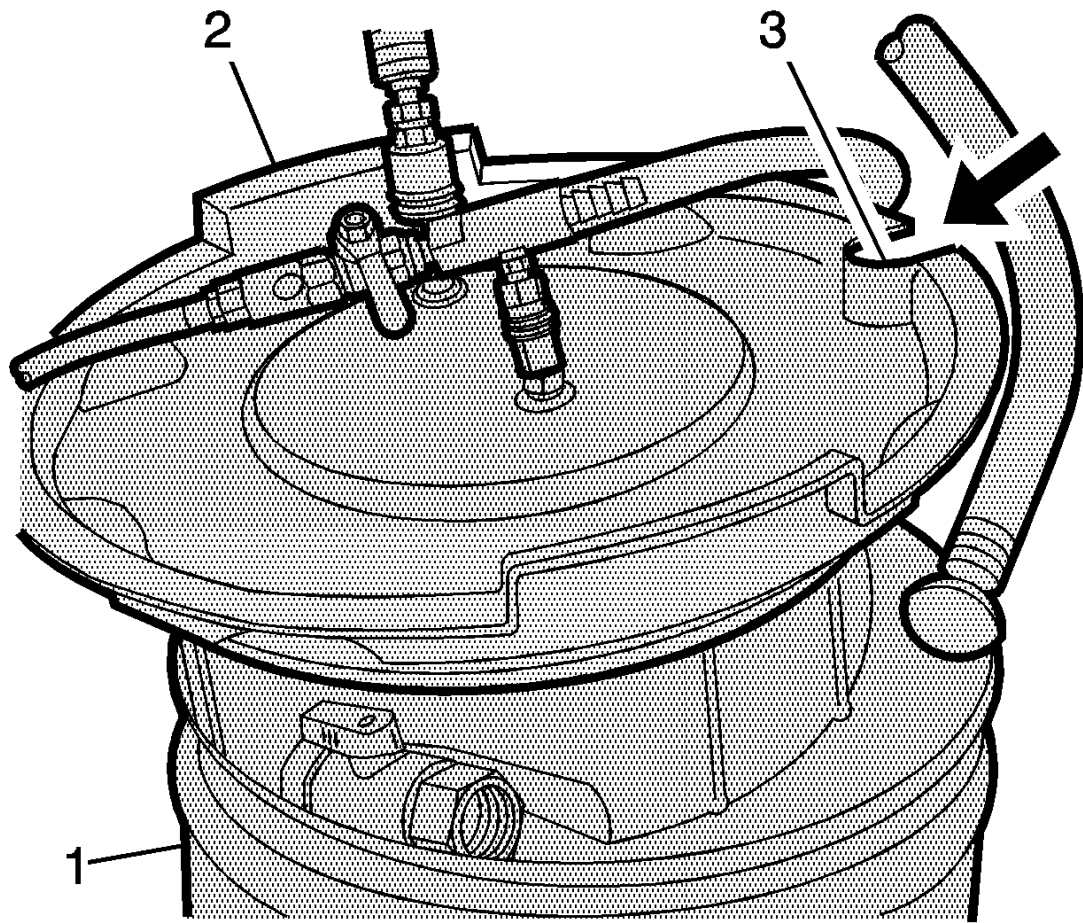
Graduated Reservoir, Vacuum Tank & Cut-Out Area
